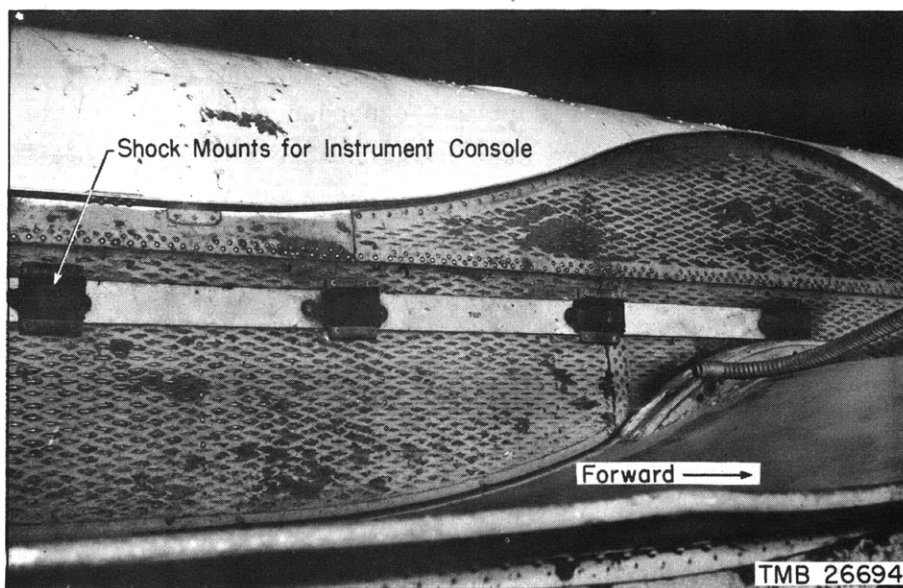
View of Shock-Mount Installation, Looking Down on Main Deck
